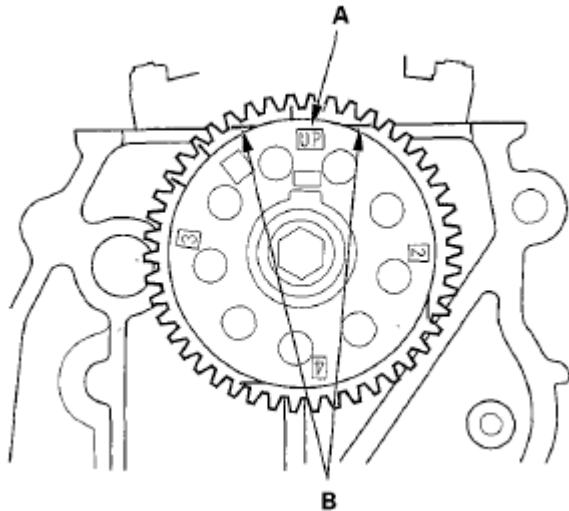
Identifying Camshaft Position Pulse Plate And Rocker Shaft Holder
